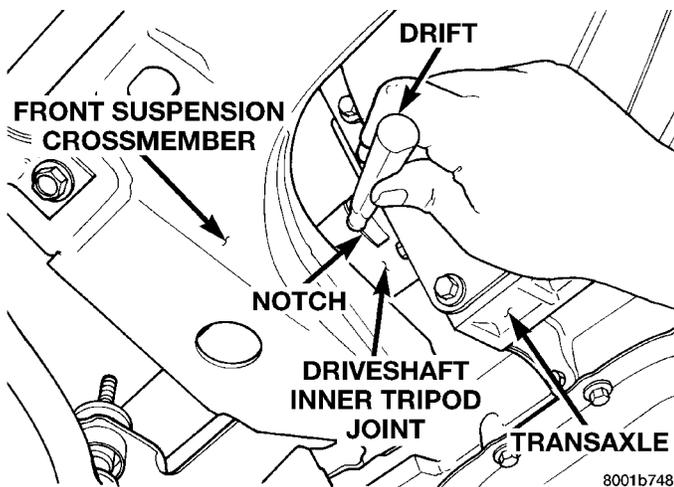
Disengaging Left Inner Tripod Joint from Transaxle
